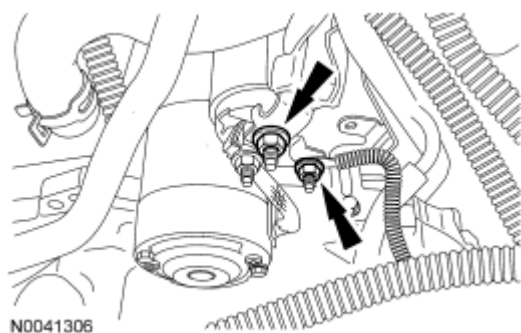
Identifying Wiring Harness Fasteners & Torque Converter Housing Stud Bolt
